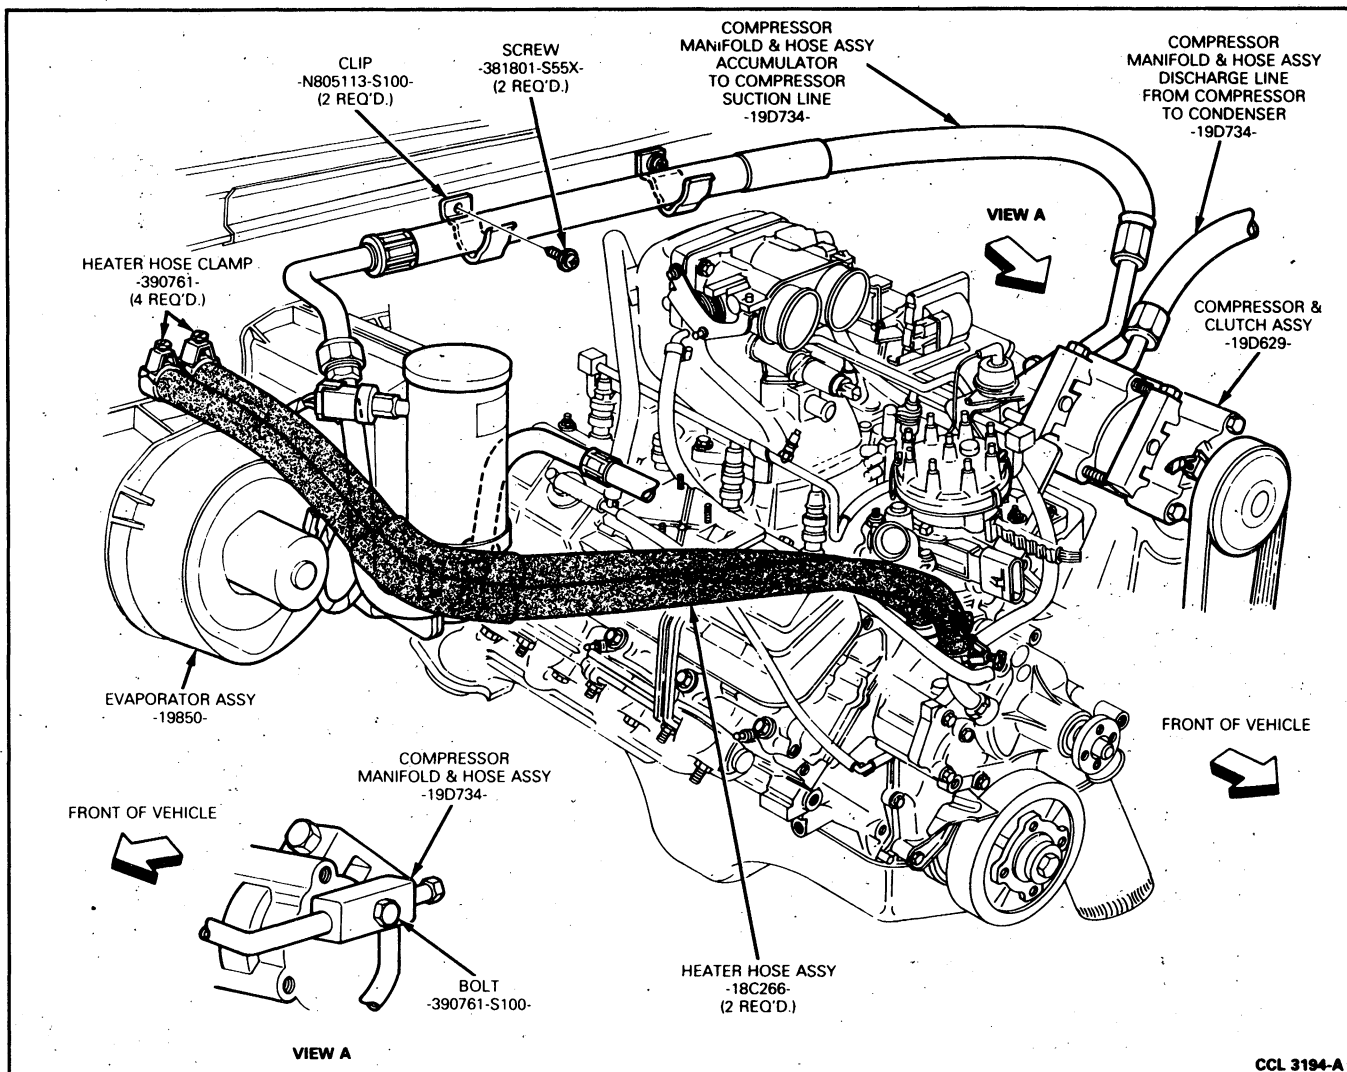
Heater Hose Installation—7.5L (460 CID) Engine
